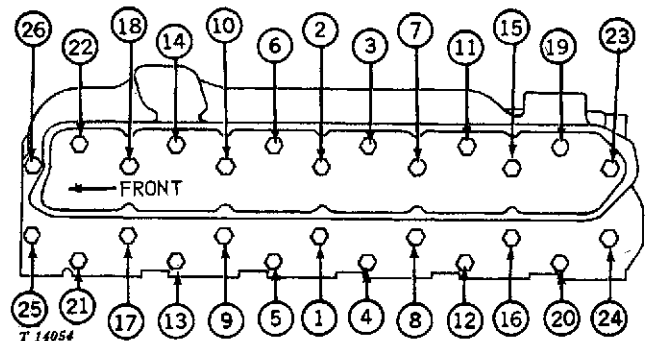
Proper Sequence for Tightening Cylinder Head Cap Screws
